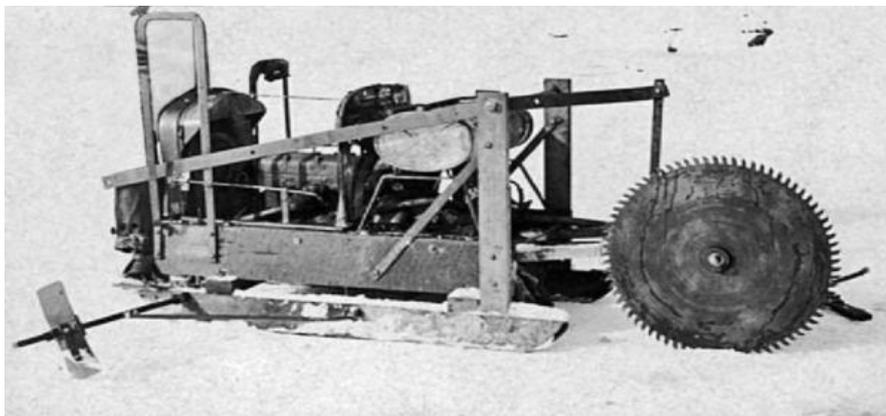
Wood saw machine invented by Tabitha Babbitt [3].
